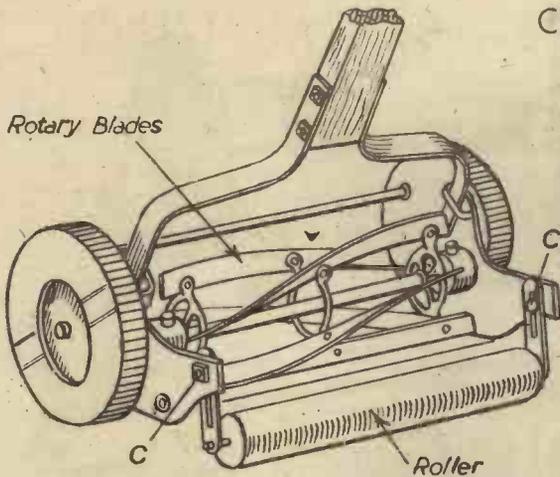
Rear view of a side-wheel mower showing the rotary blades and roller.
